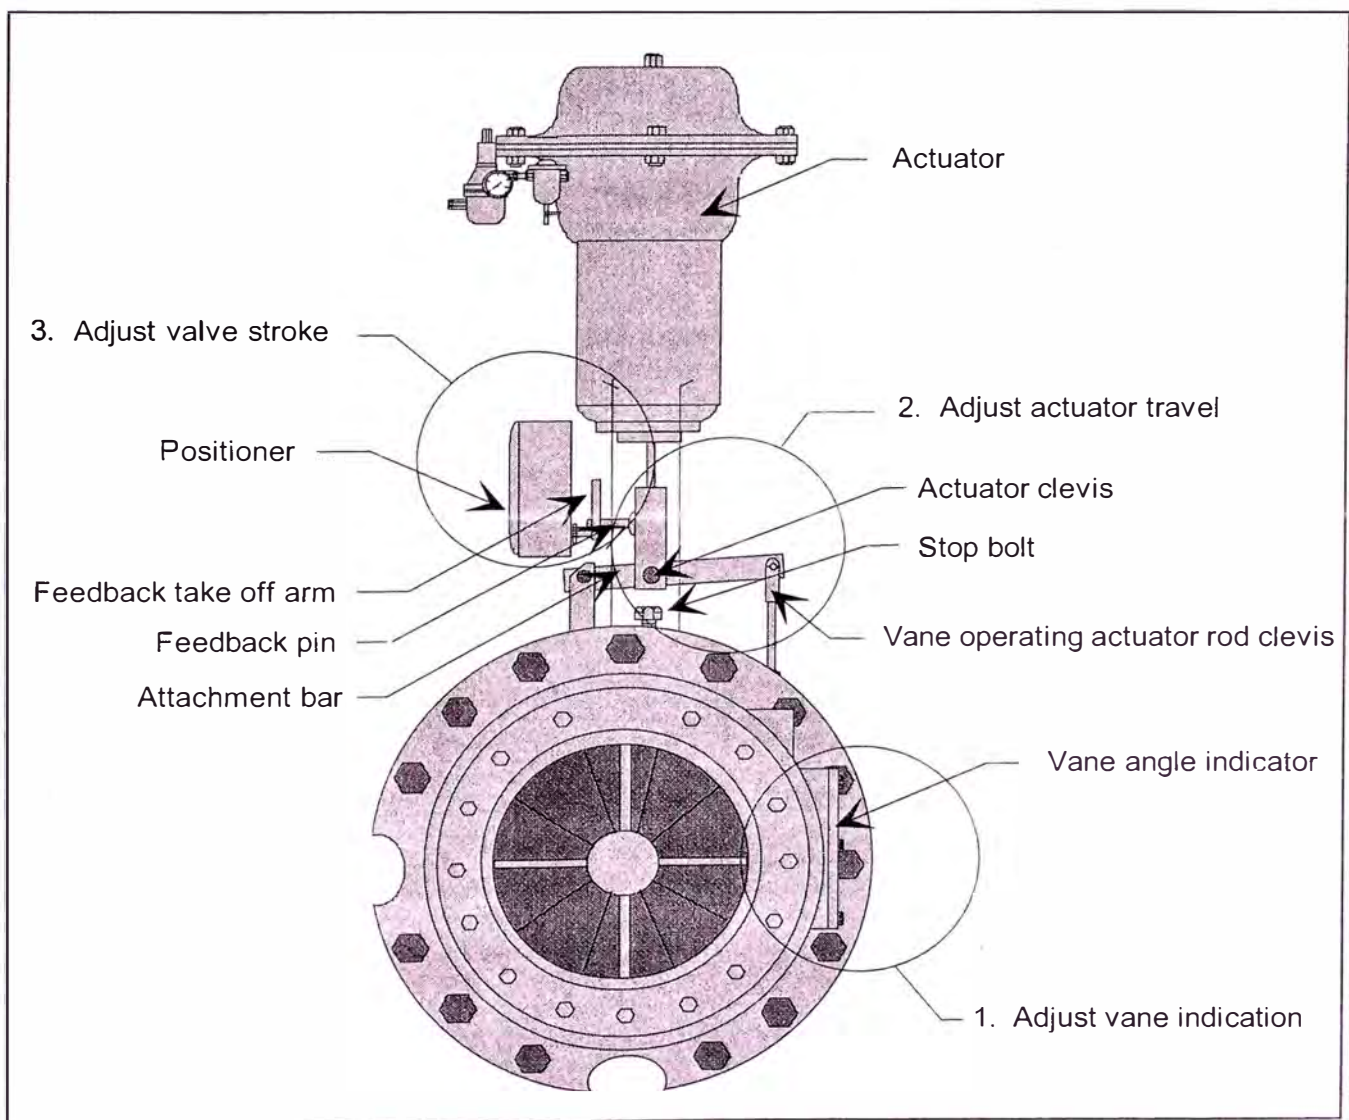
Inlet Guide Vane (toggle rod driven vanes)
